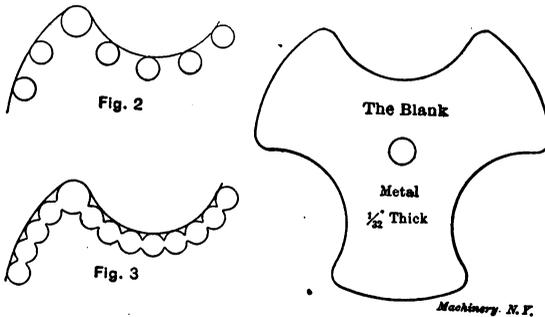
Die used as Example in Illustrating Principles of Making Blanking Dies.
